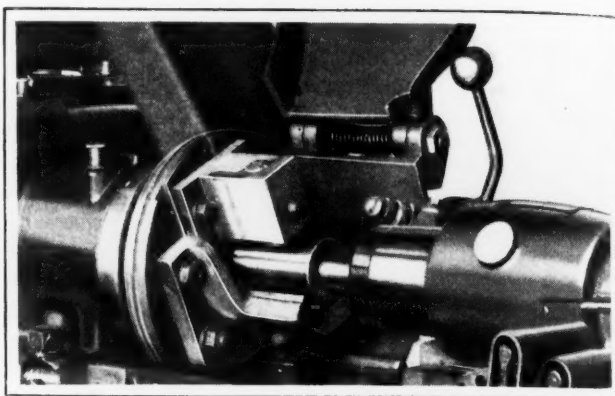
Grinding the Holes in the Spacing Collars on an Automatic Internal Grinder
